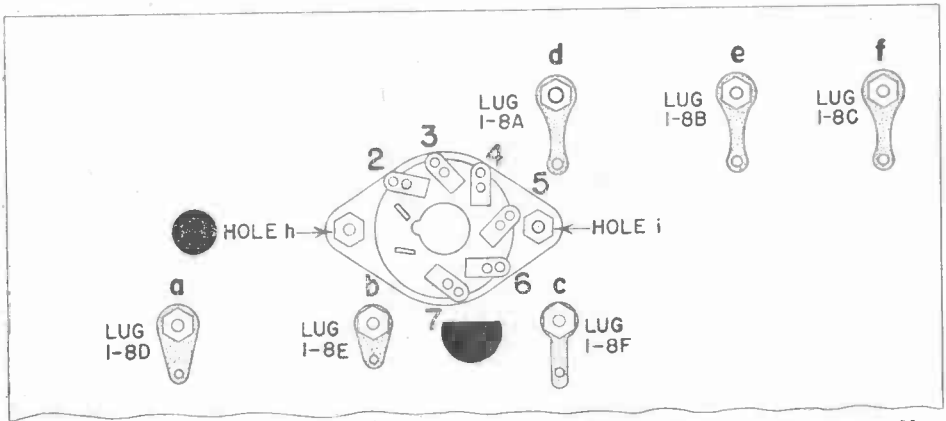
Your chassis should appear exactly like this after you complete Step 1 in Experiment 9. Note that the socket has been fastened to the under side of the chassis.
